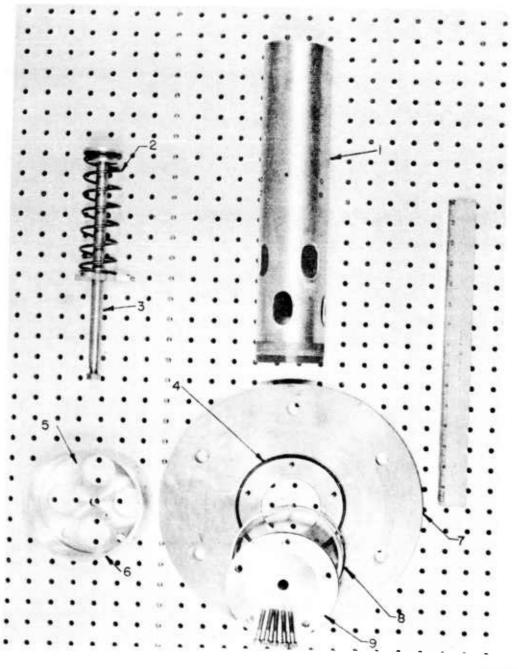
EXPERIMENTAL SLEEVE VALVE SHOWN DISASSEMBLED
